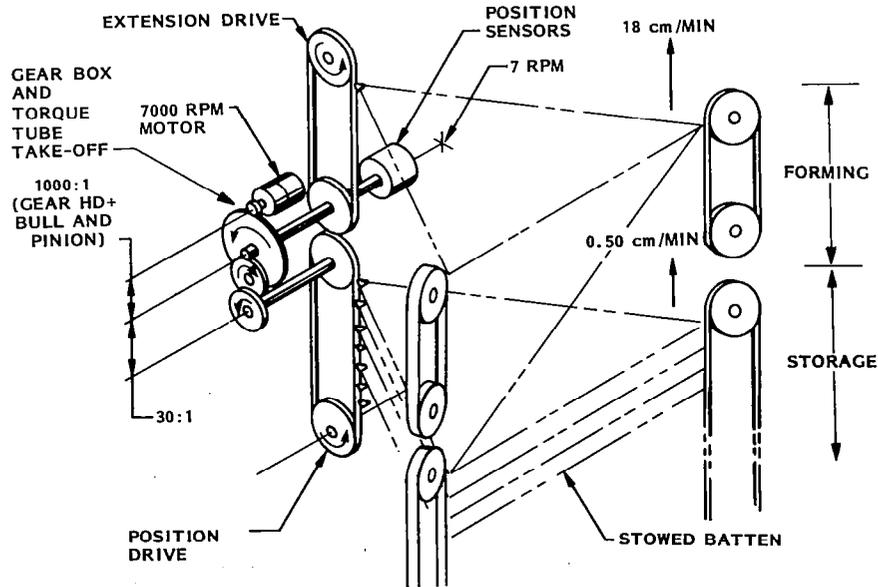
EXTENSION/RETRACTION DRIVE MECHANISM
